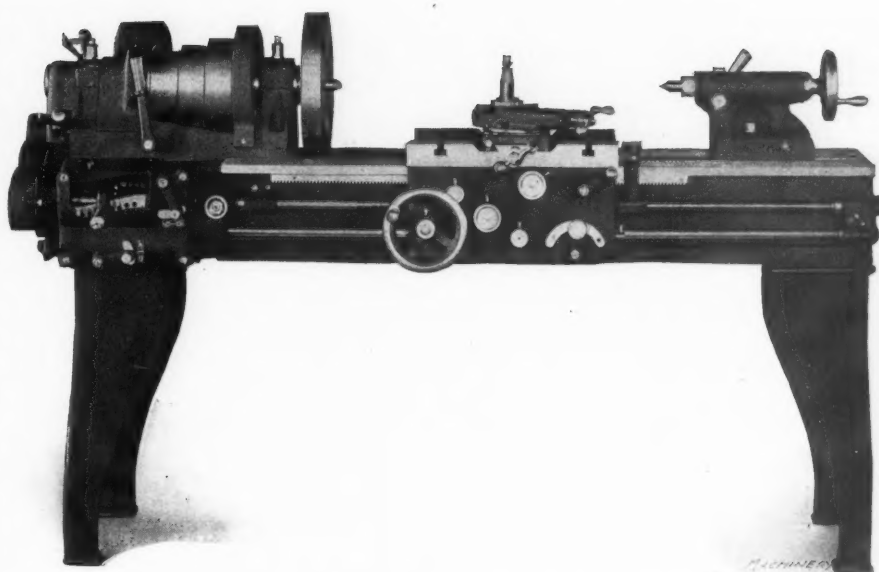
Rockford 13-inch "Economy" Lathe equipped with Quick-change Gear Unit
